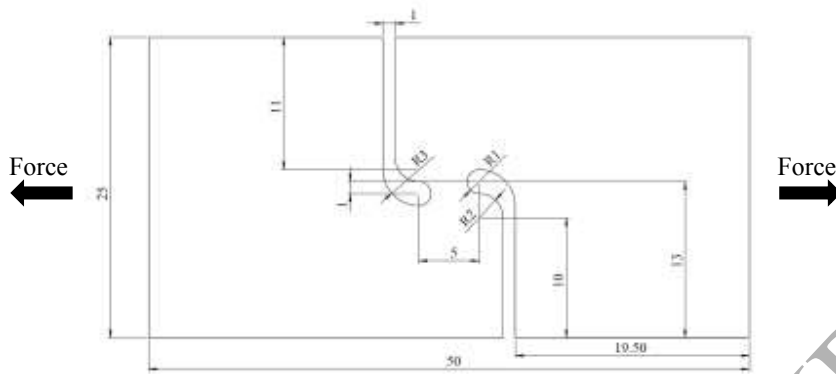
Shear specimen geometry of Peirs *et al.* (2012). All dimensions are in millimeters.
